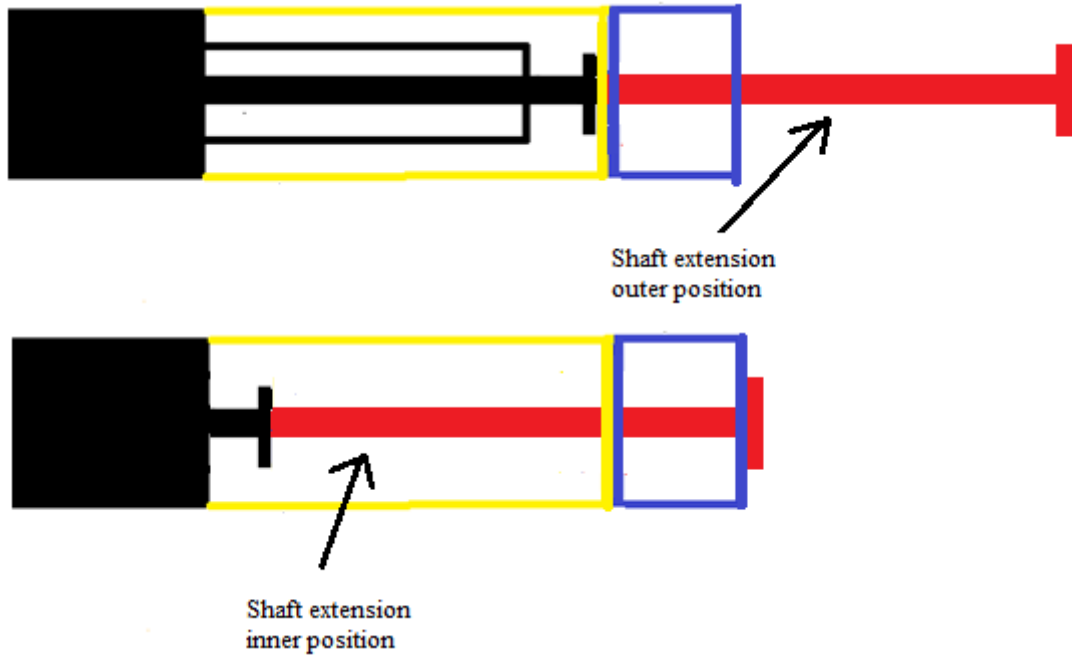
Driller - cutting tool interface with bearing connection and shaft extension
